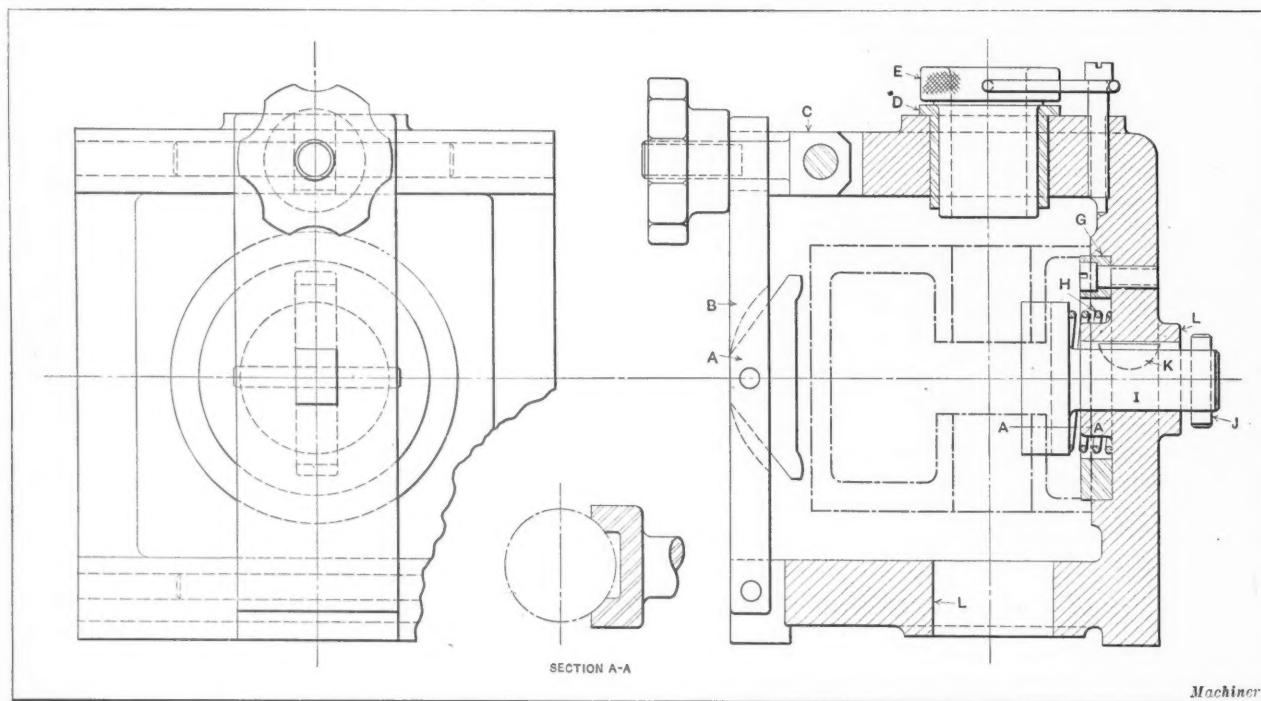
Jig used in drilling Wrist-pin Hole in Motor Piston
